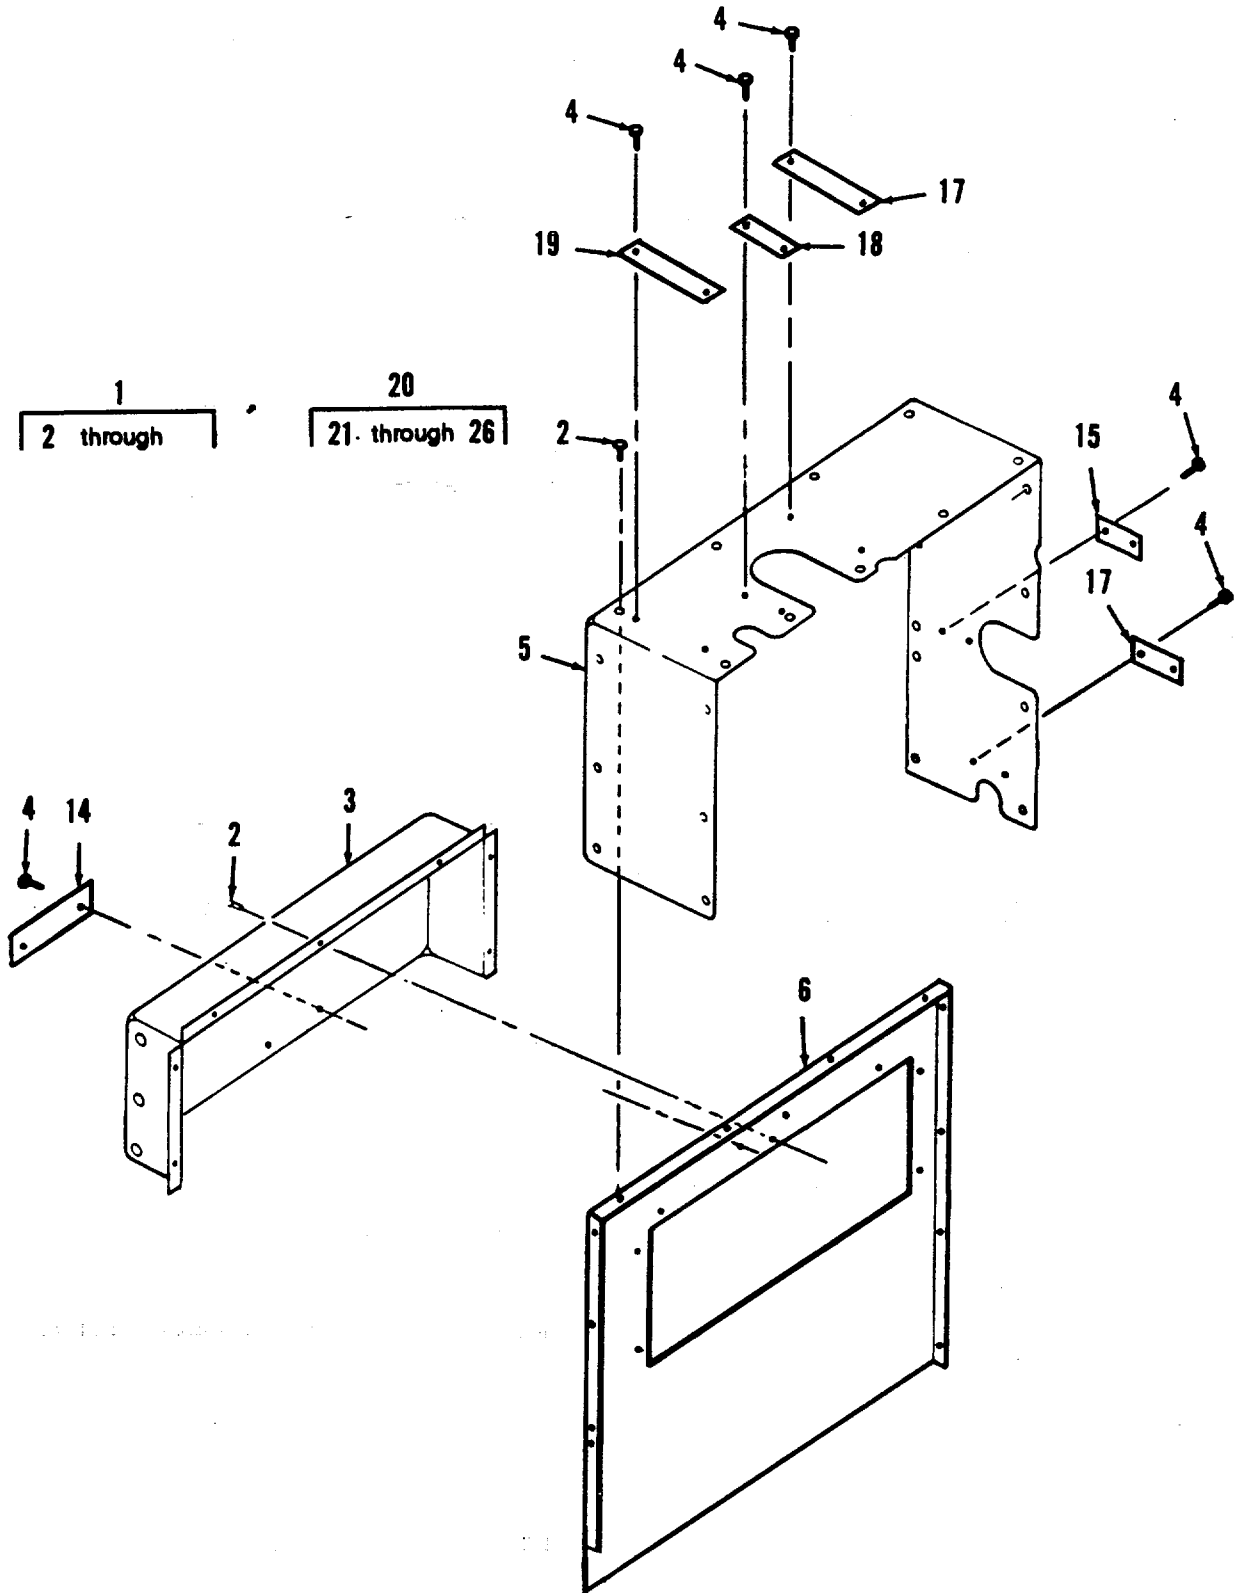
Enclosure Assembly Outlet Side (Sheet 1 of 2)
